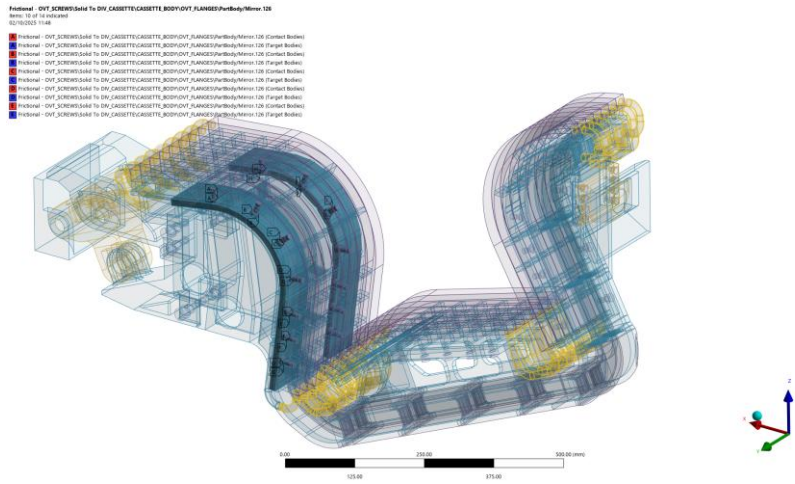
Frictional contacts between OVT connection screws heads and OVT flanges
